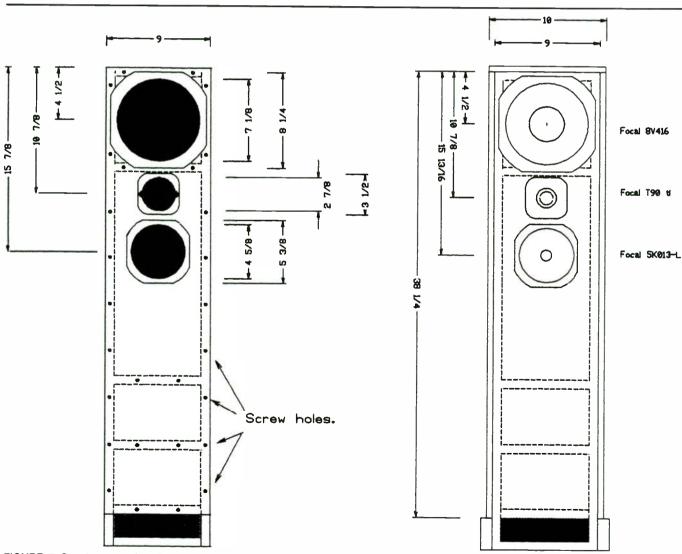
Speaker mounting dimensions with front baffle screw layout guide (left), and possible finishing treatment (right).
